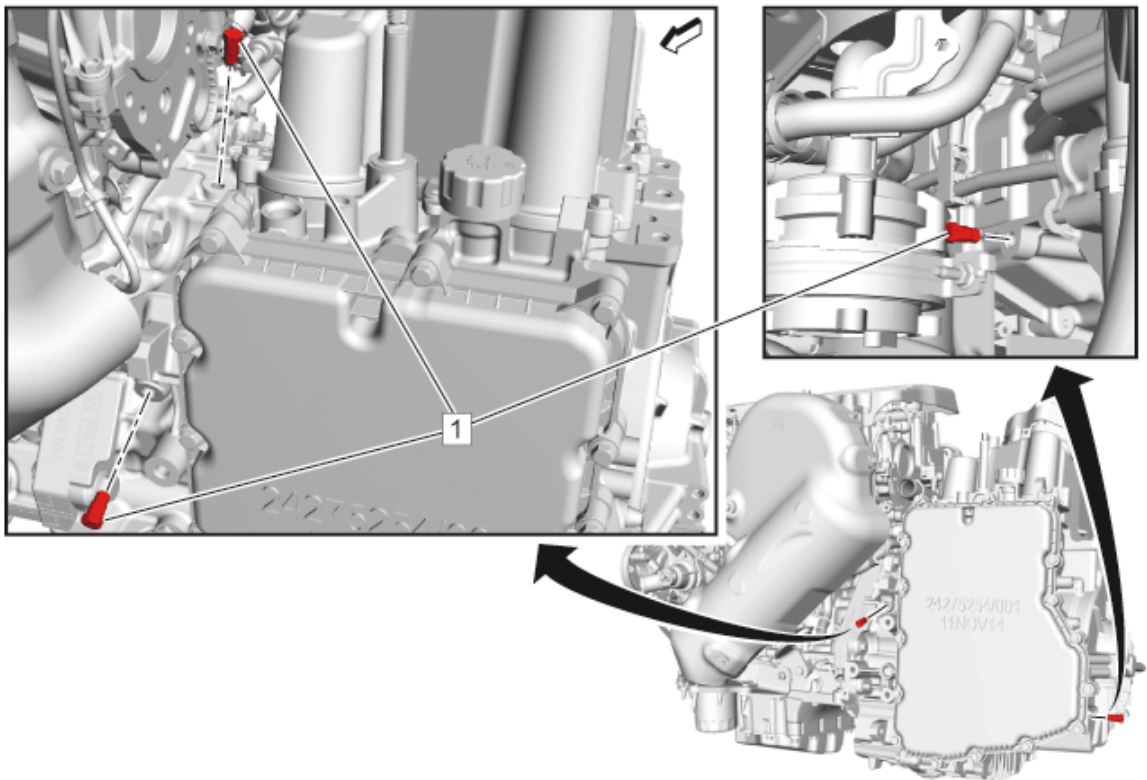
Automatic Transmission Fluid Pressure Test Hole Plug
